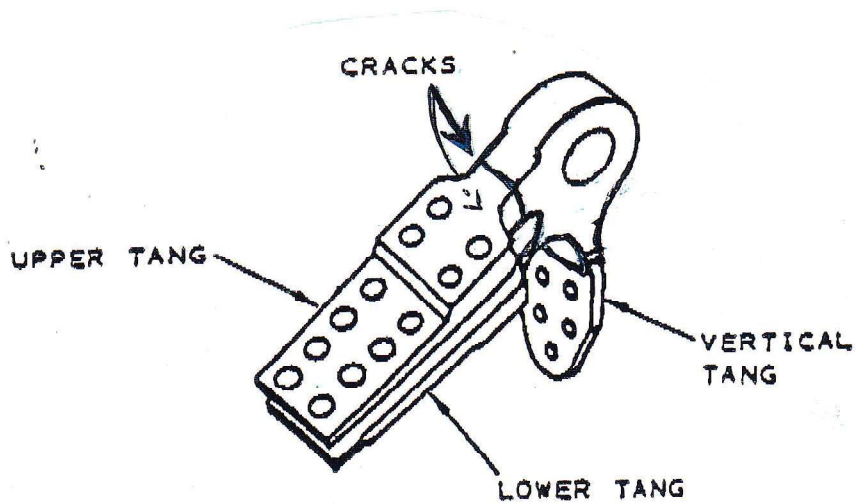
View on as-received structure containing upper and lower tangs fractured from inboard and outboard midspar fittings. This section was cut from the engine that had separated.
